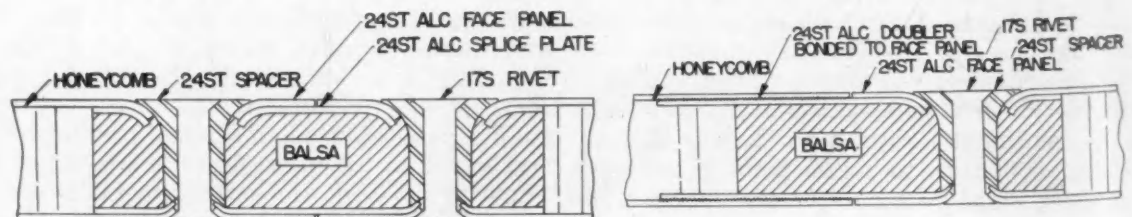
A (left): typical butt splice; B (right): typical butt splice with doubler bonded to face panel
